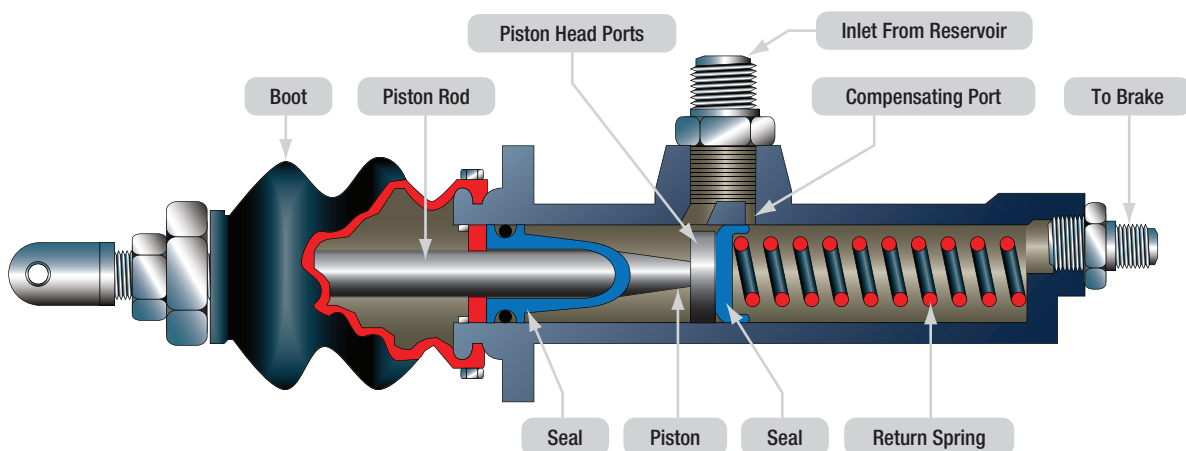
A Goodyear brake master cylinder from an independent braking system with a remote reservoir.
